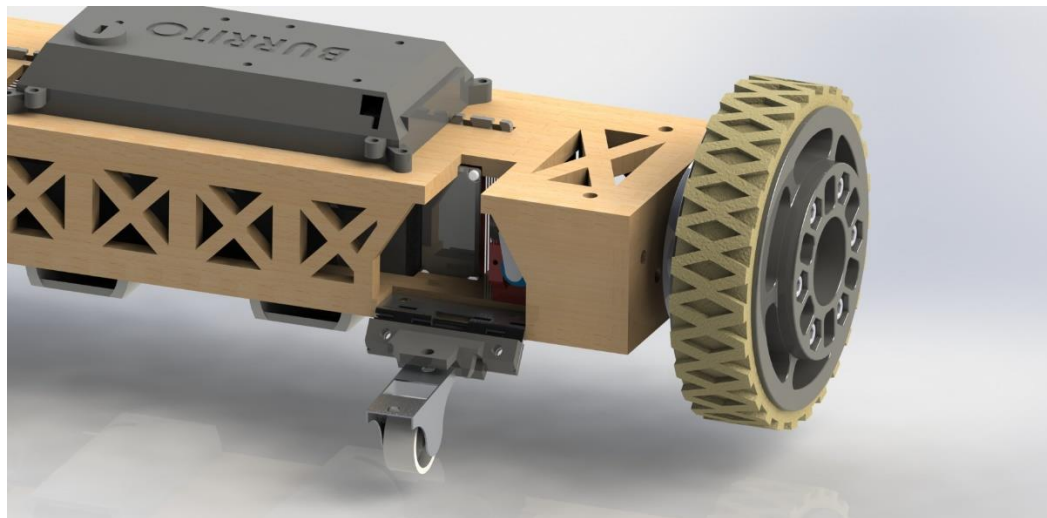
BURRITO Caster Wheel Arm Deployed
